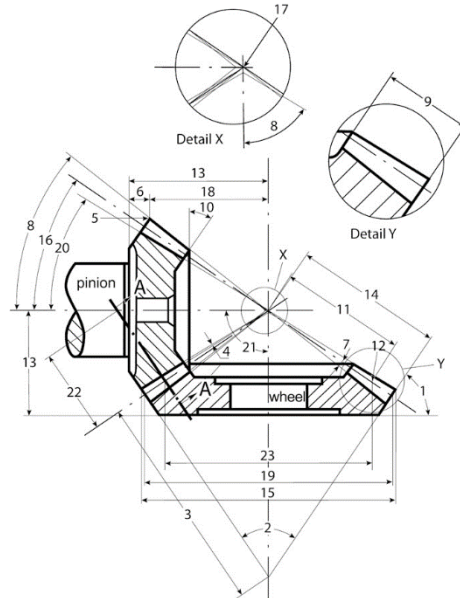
Bevel gear geometry definition in the axial section [13]
